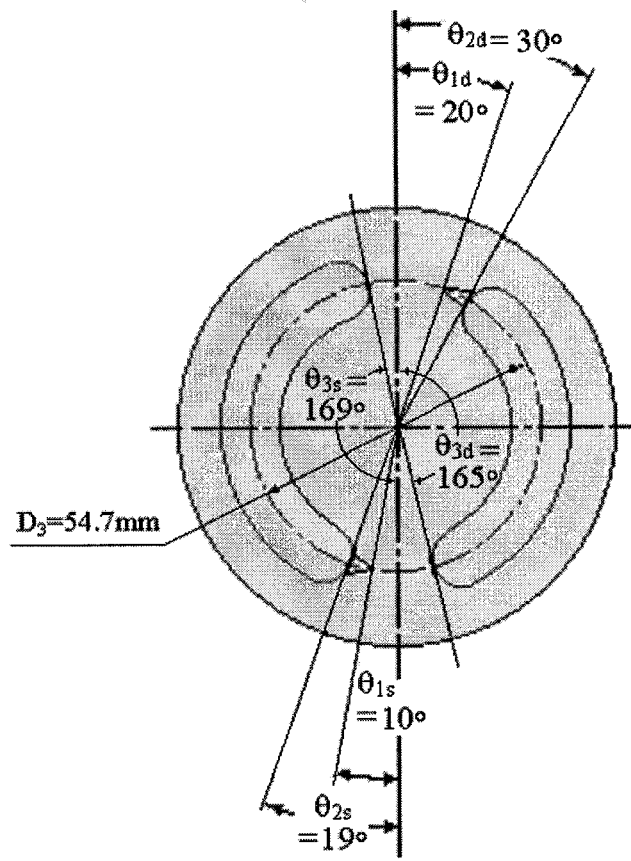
Layout of the desirable port plate for a swash plate pump of geometric
